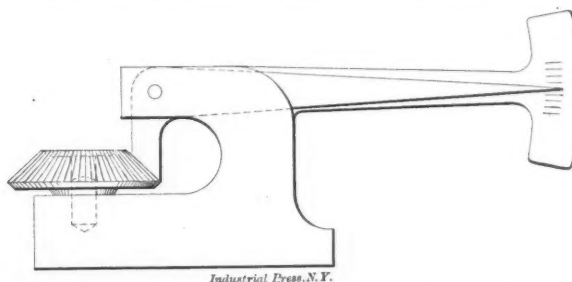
Sensitive Attachment applied to Gaging Bevel Gear Blanks.
